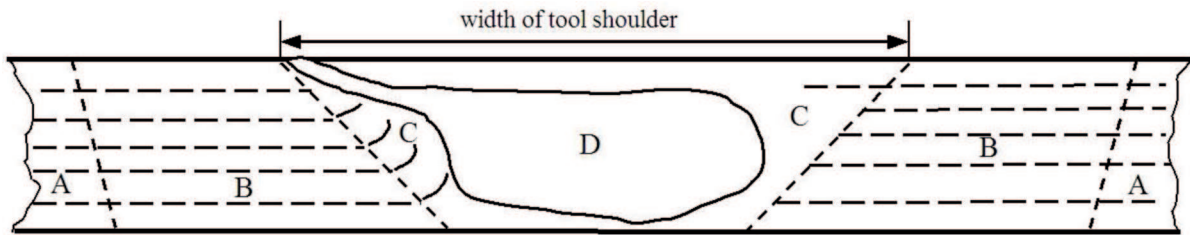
Characteristic regions in the FSW welded joint A – parent material, B – Heat affected zone, C – Thermomechanical affected zone, D – Weld nugget [2]
